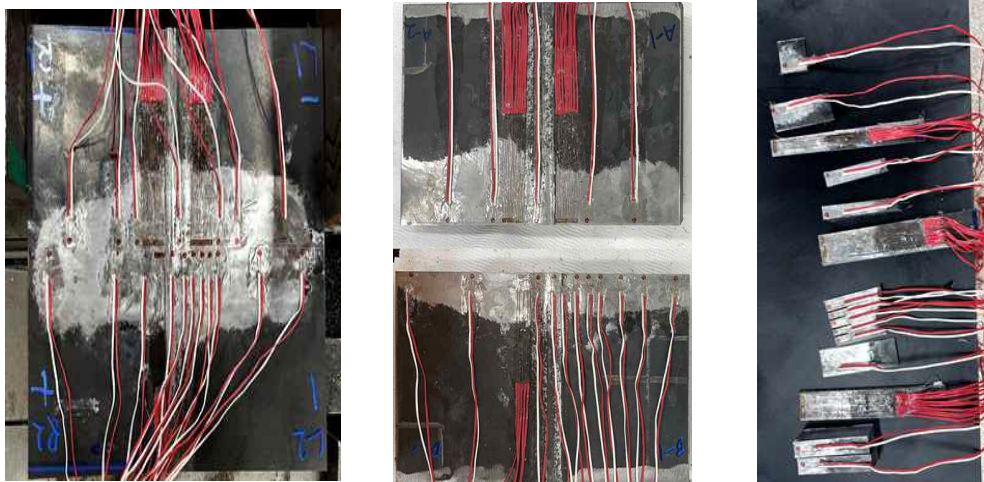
Strain gauge attachment position of unconstrained weld
